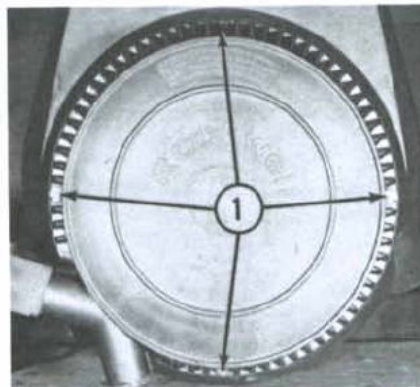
Recoil starter is retained by four slotted screws (1). On some models, starter must be removed separately for access to flywheel.
